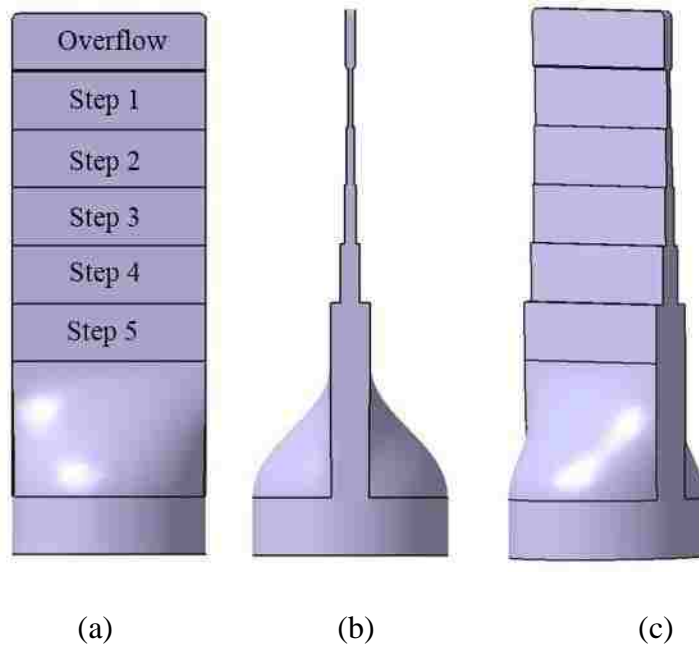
2: 3-D model showing the (a) front view (b) side view and (c) isometric view of the 5-step casting.
